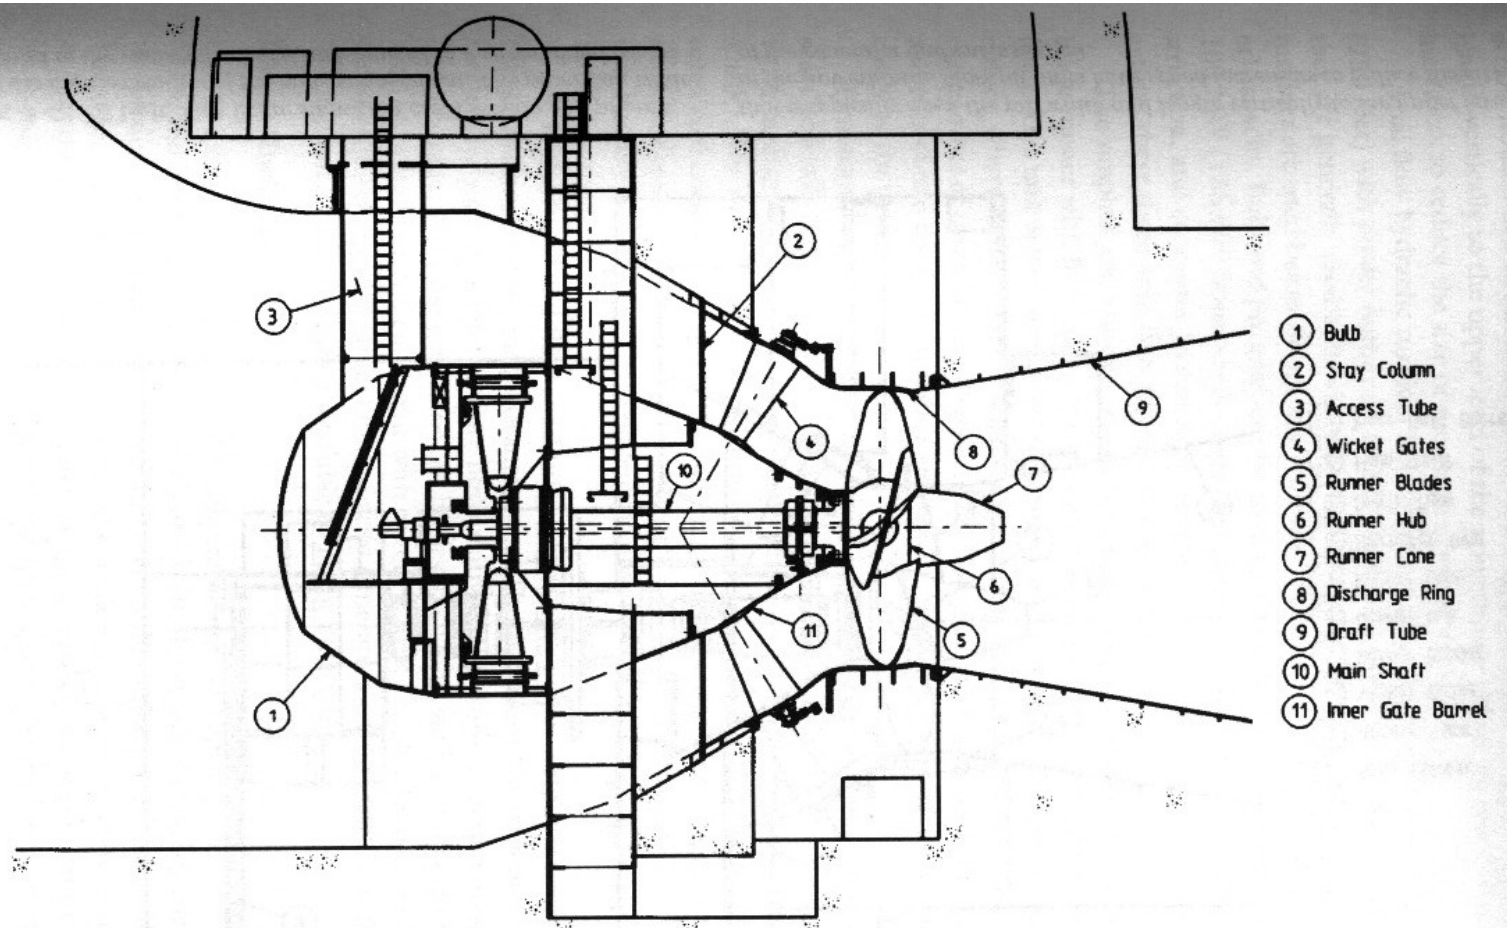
Bulb Unit. This figure is a cross-sectional drawing of a bulb unit. A bulb unit is a horizontal unit with a conical-shaped draft tube.
